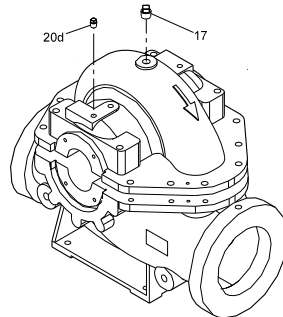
Position of the vent valve and plug for shaft seal flushing
